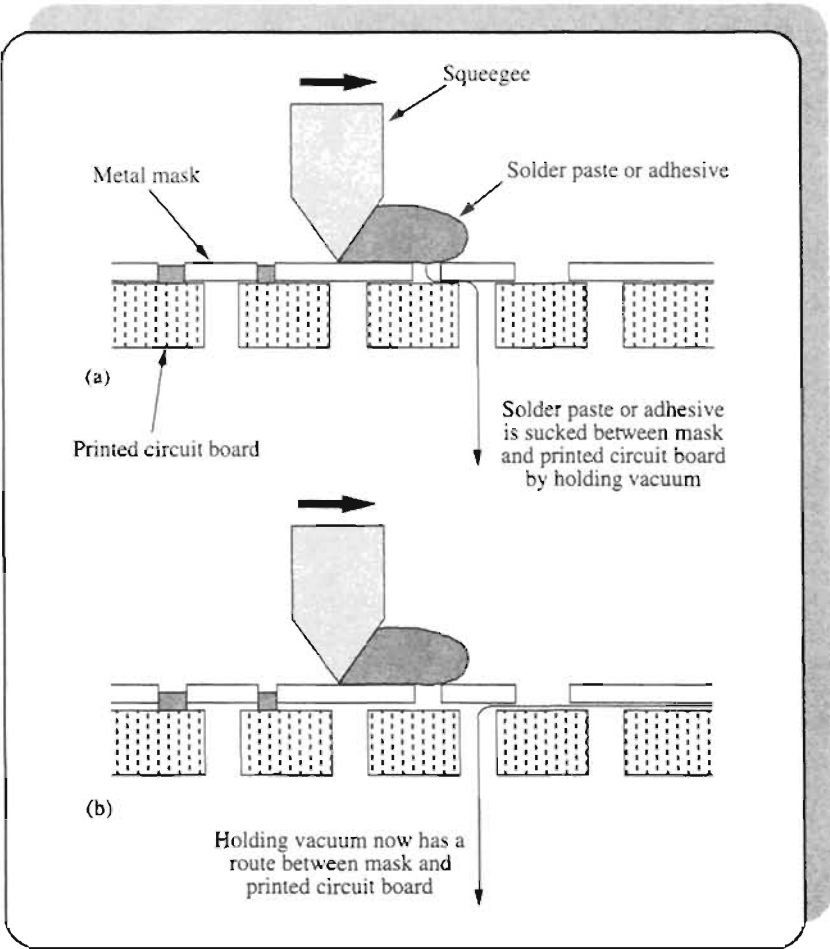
Showing why print gaps are often still used with metal mask stencils (a) without a print gap, the holding vacuum can suck solder paste or adhesive through printed circuit board holes (b) with a print gap, the holding vacuum has an alternative route
